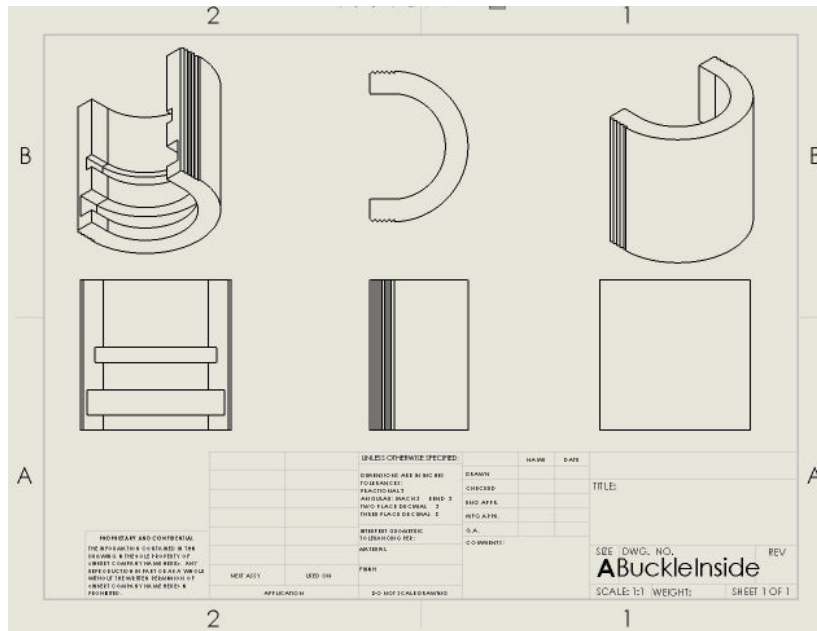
Solidworks drawing of the inside half of the buckle design that will go around the magnet.
